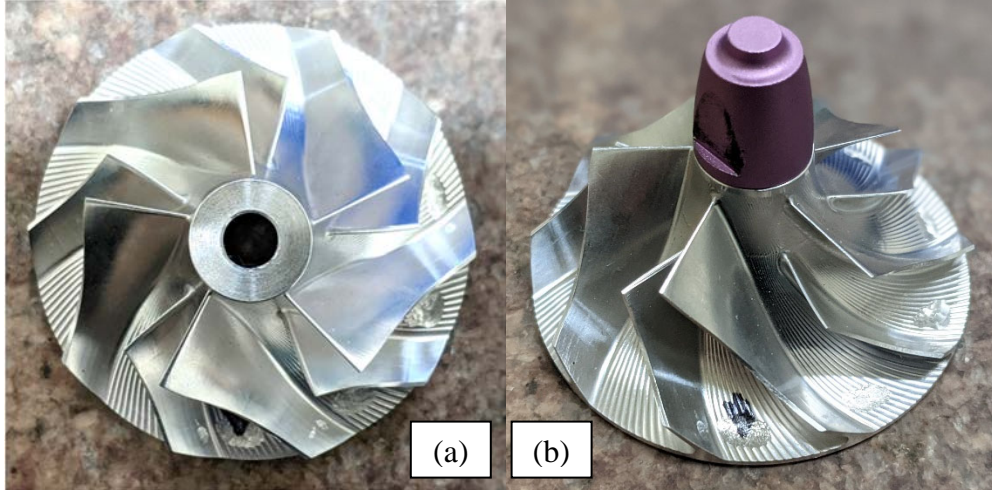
Compressor impeller (a). Impeller with electric motor coupler (b).
